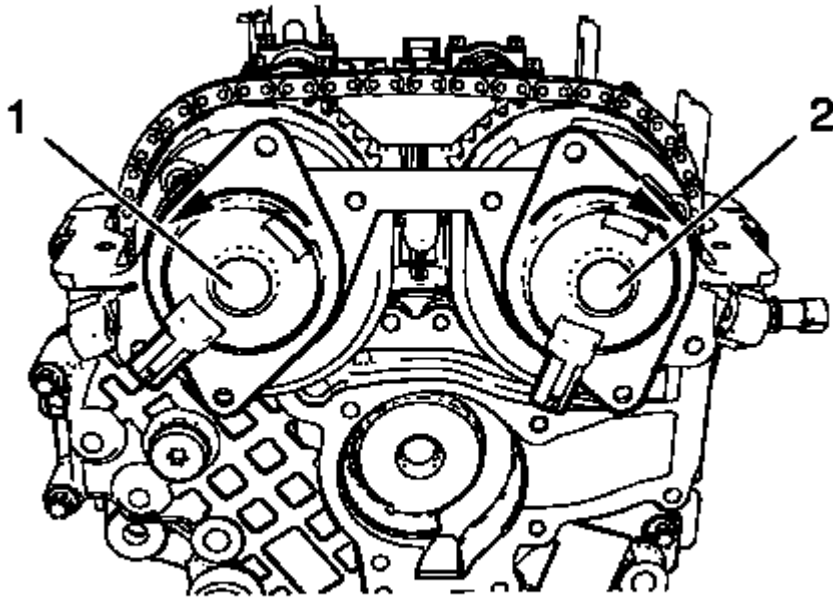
Intake Camshaft Position Actuator Solenoid Valve And Exhaust Camshaft Position Actuator Solenoid Valve
